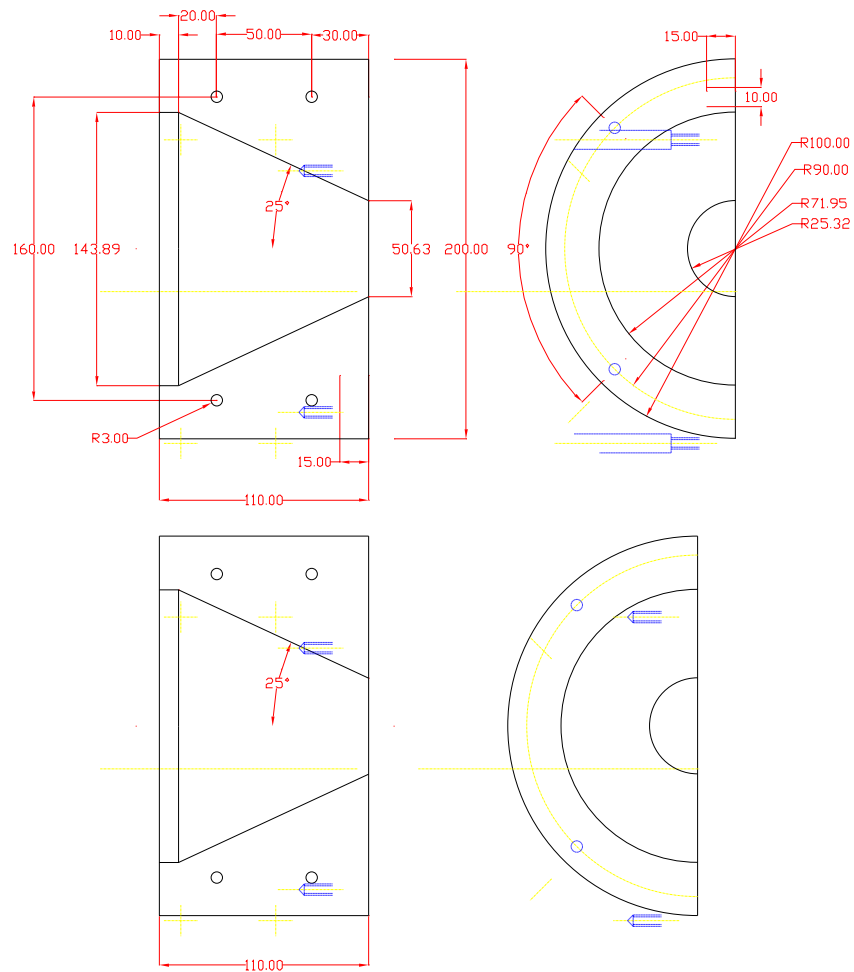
The first half of the mold in two parts (dimensions in mm). When machining both the halves were machined as one single half.
